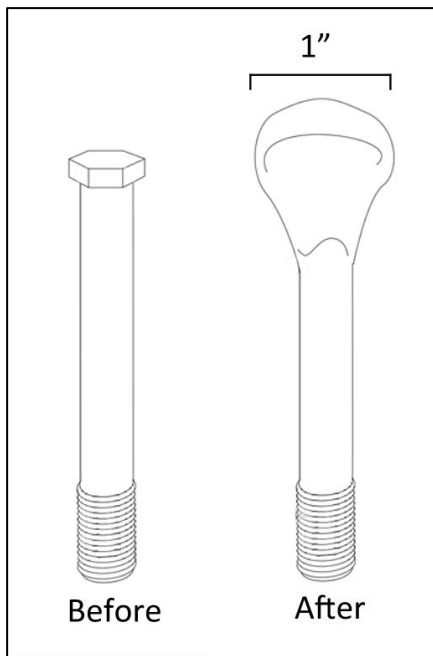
1" bulb welded on to head of 4" bolt
